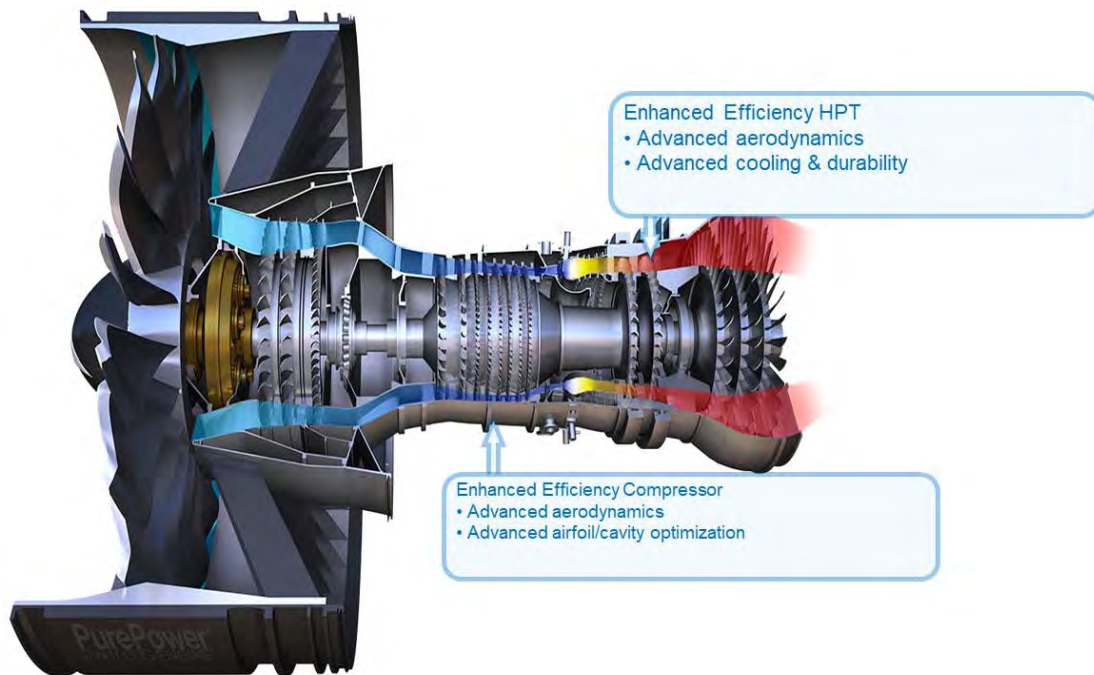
Pratt & Whitney's Geared Turbo Fan Engine with CLEEN II Core Technologies
